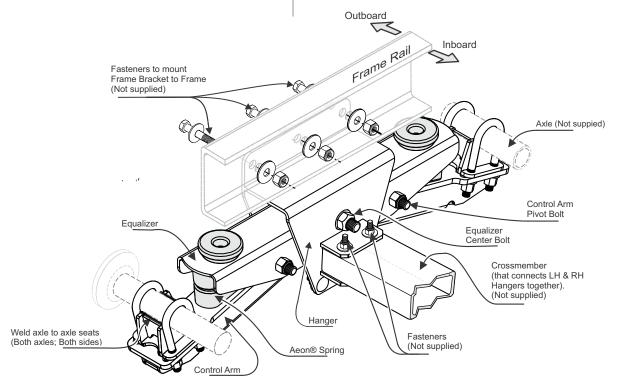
Installation of suspension to trailer frame (one side shown only, perspective view from inboard)
